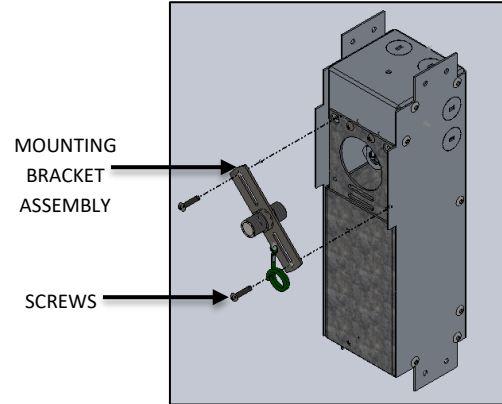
MOUNTING BRACKET DISASSEMBLY
